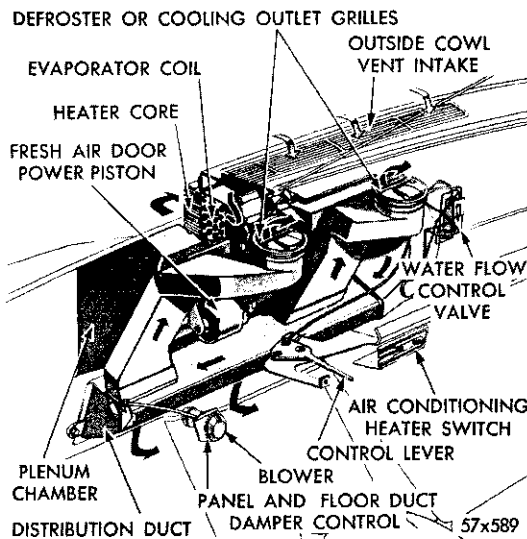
Heater-Air Conditioning (Schematic Drawing Engine Compartment Installation)
